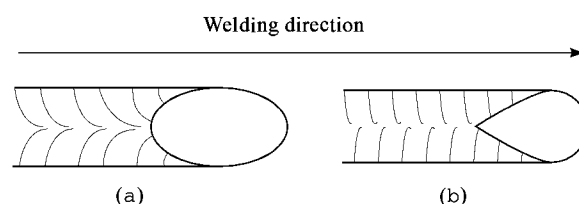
Weld pool shape and resultant weld-metal solidification direction. (a) Slow welding speed. (b) Rapid welding speed.
